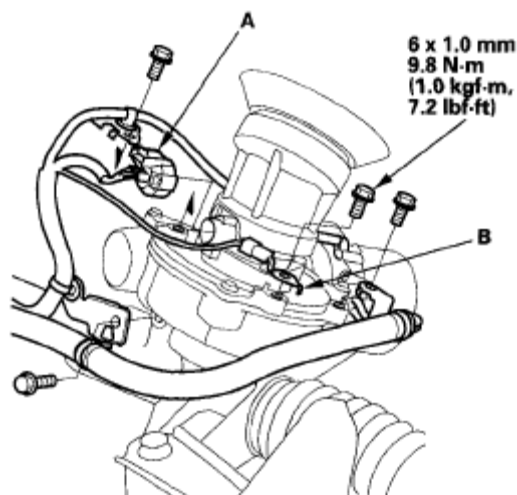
Identifying Steering Gearbox Harness Clamp Bolts (With Torque Specifications)
